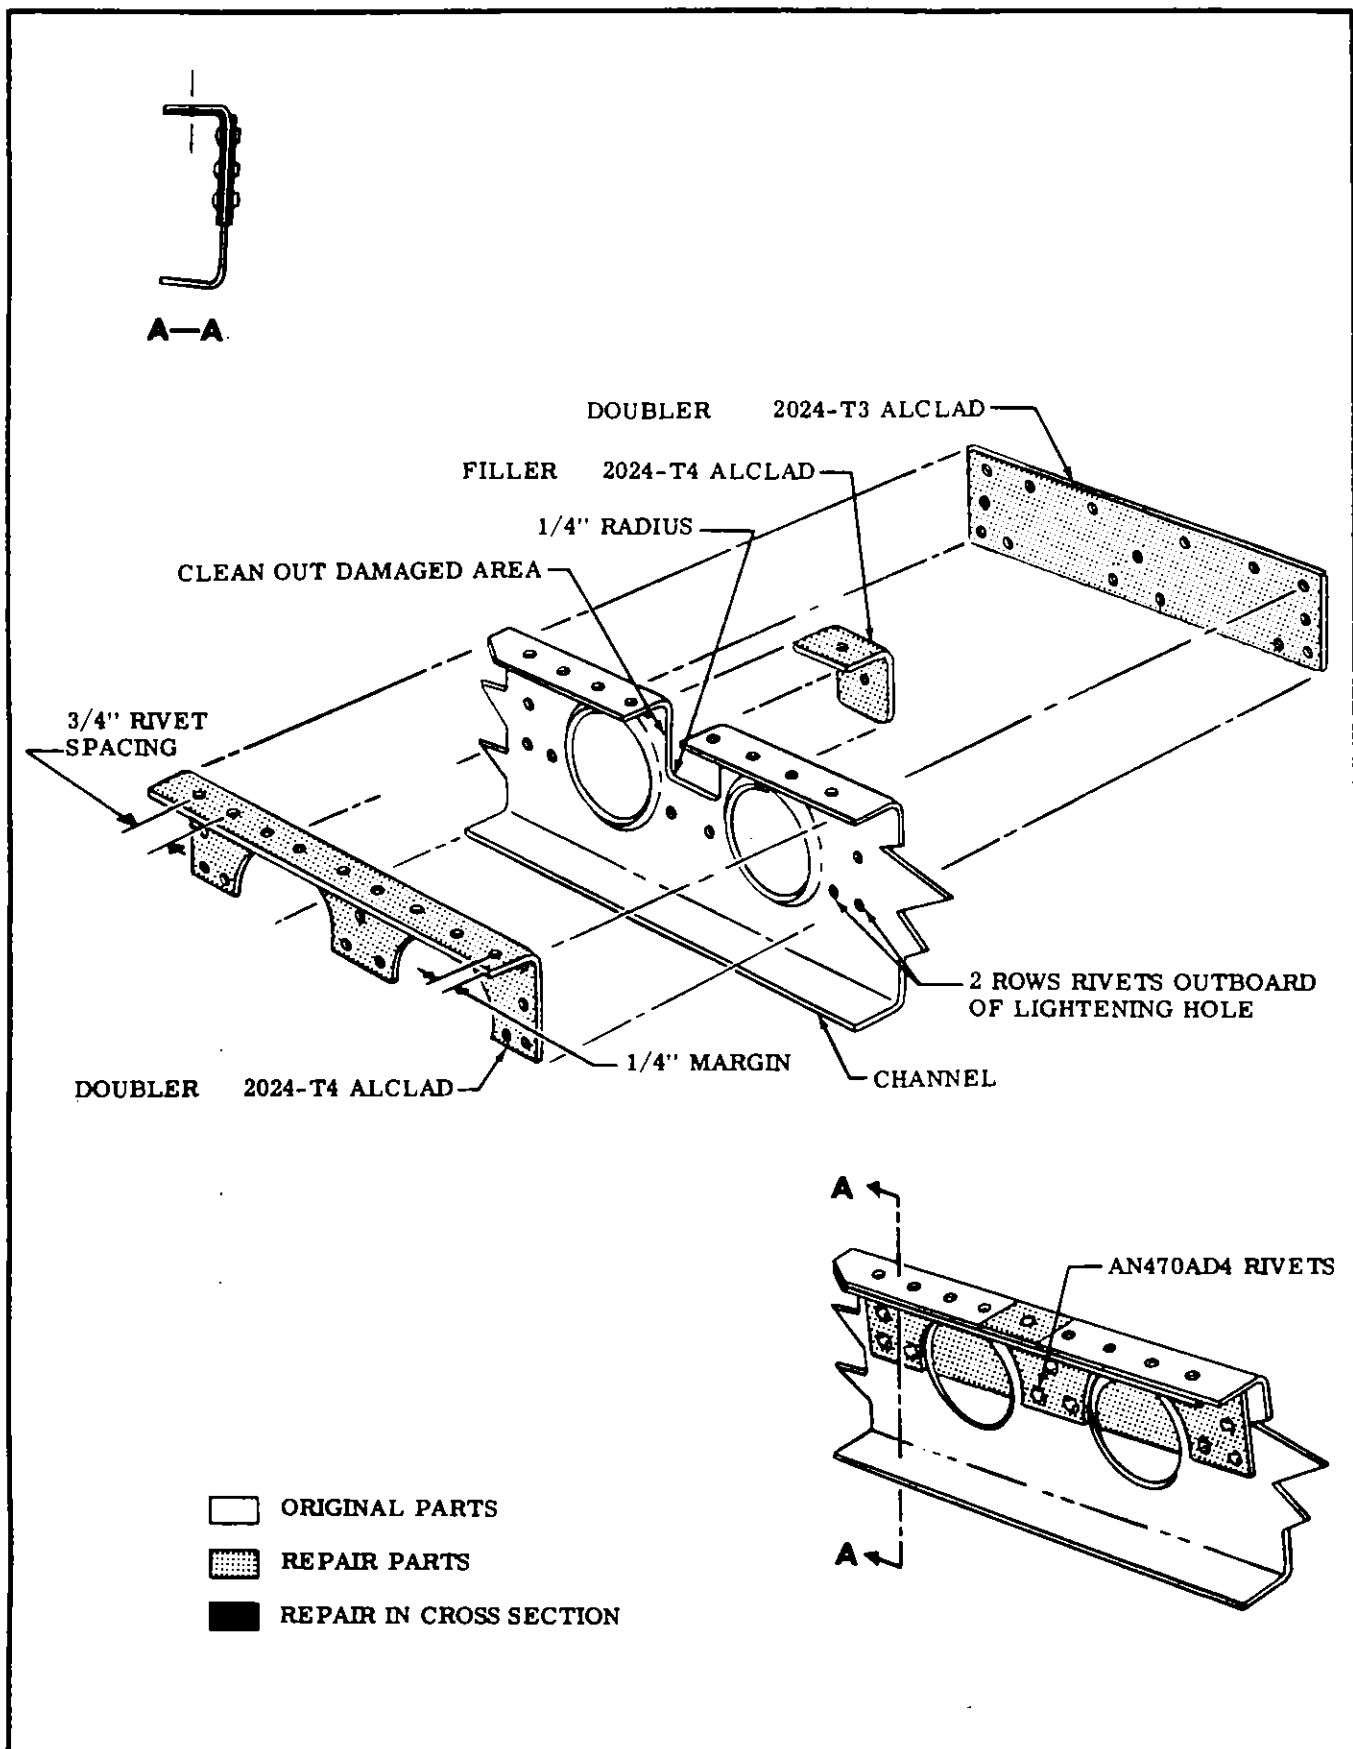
Stringer and Channel Repair (Sheet 4 of 4)
